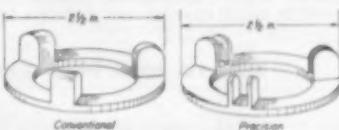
Part Redesigned from a Conventional Sand Casting to a Precision Sand Casting. Savings in cost of machining more than offset the increased cost of casting.
